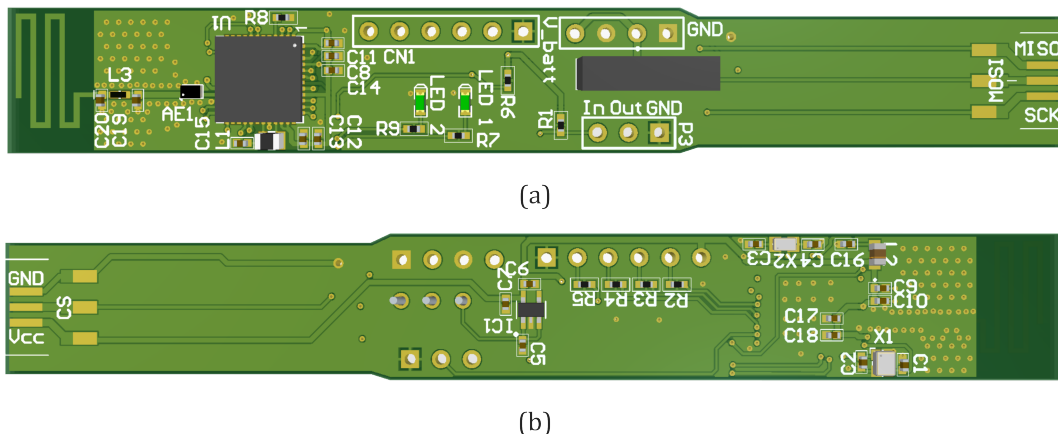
Top and bottom views of the PCB layout for the Athos system acquisition probe. (a) Top view. (b) Bottom view.
